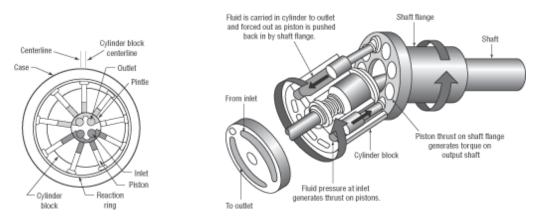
Radial Hydraulic Motor and Axial Hydraulic Motor [29]
